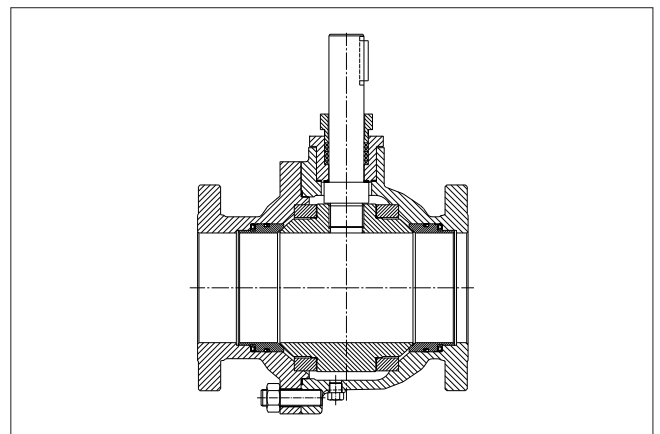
Construction, sizes DN 250/10" to DN 600/24", trunnion mounted ball
